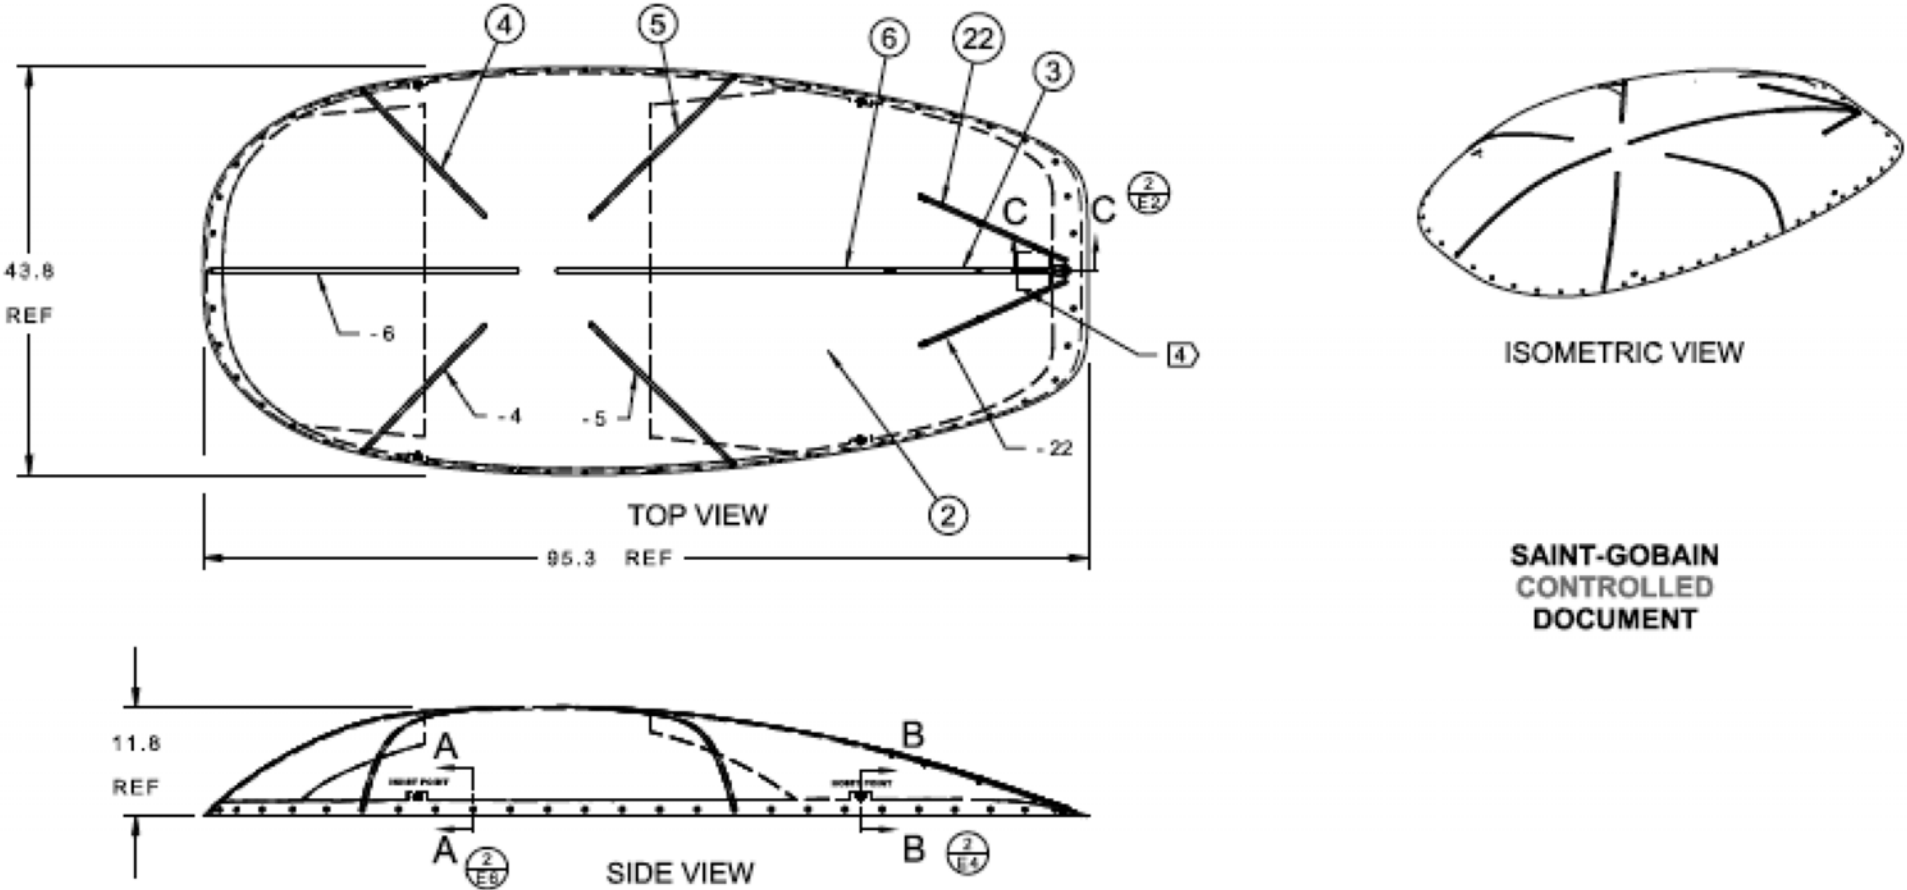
(Sheet 13 of 14) FMA Outline and Installation Drawing (90000380ICD, REV L)
